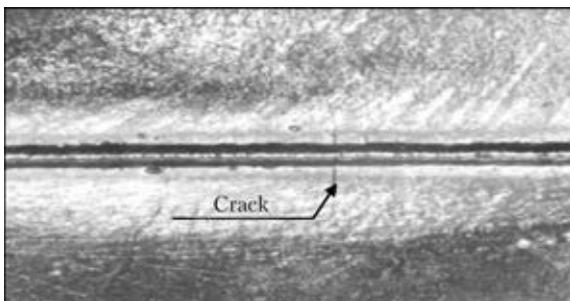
Appearance of EBW weld with a characteristic defect in the form of a crack
